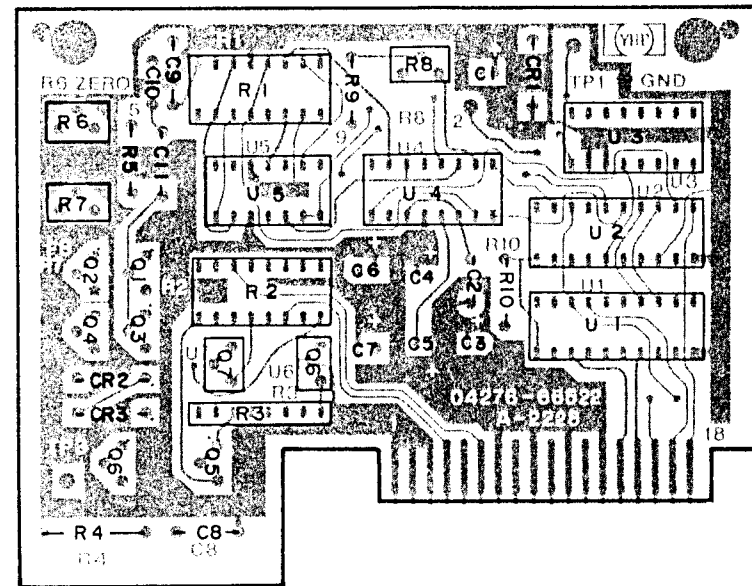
XX. A21 HP-IB Board Assembly Component Locations.
